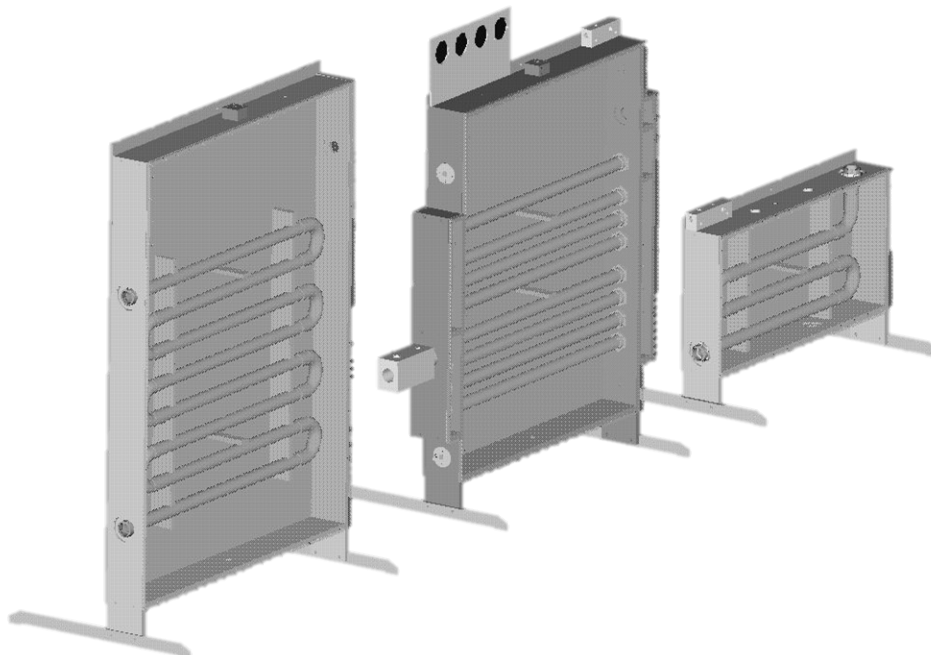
Three dimensional rendering of lab-scale MED unit using SOLIDWORKS CAD design software showing copper
